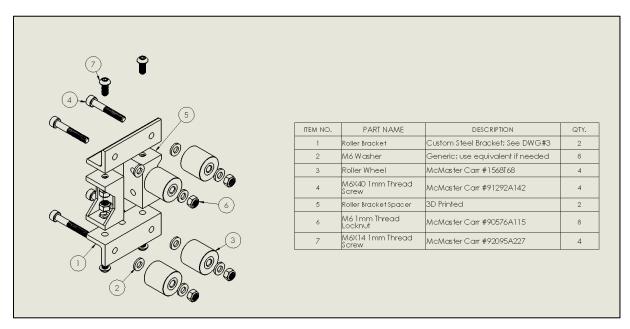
An exploded SolidWorks assembly drawing of a single roller wheel idler.
